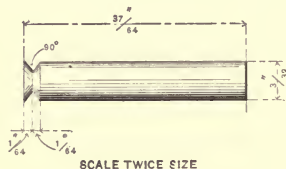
HARDENED STEEL PIN IN EXHAUST VALVE LEVER.
